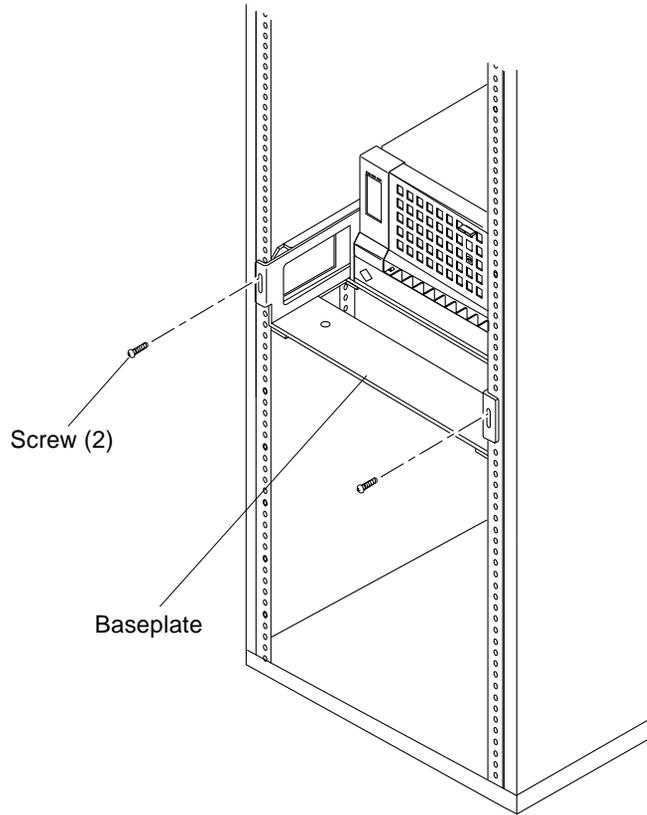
Removing the Screws Securing the Baseplate to the Side Brackets
